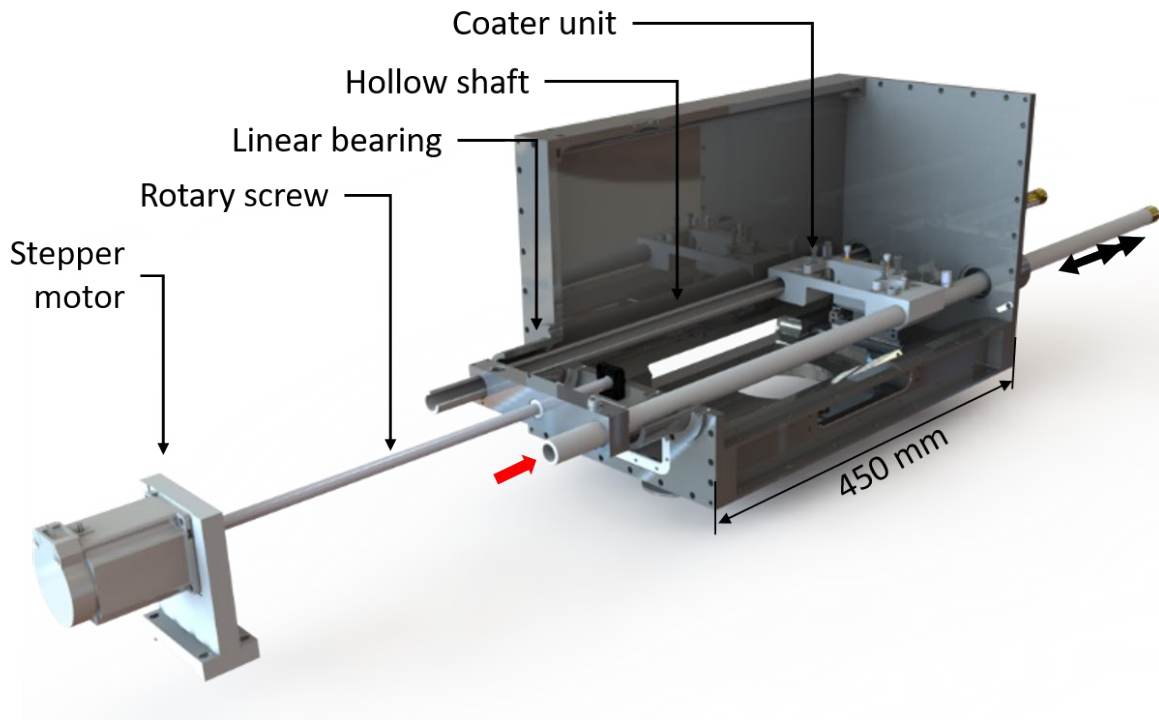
Coater unit; 1st hollow shaft, process chamber and two linear bearings in quarter section
